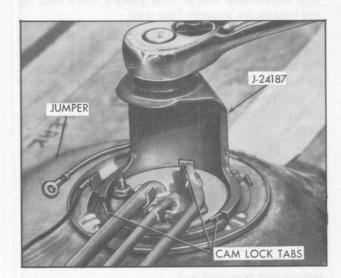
Removing & Installing Fuel Tank Sending Unit
